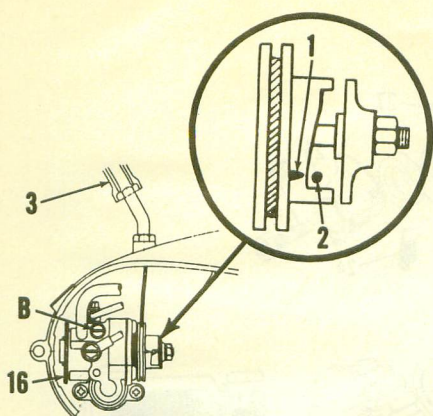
When carburetor controls are correctly adjusted and engine is at idle speed, mark (1) should be aligned with guide pin (2). Cable adjuster is shown at (3).
